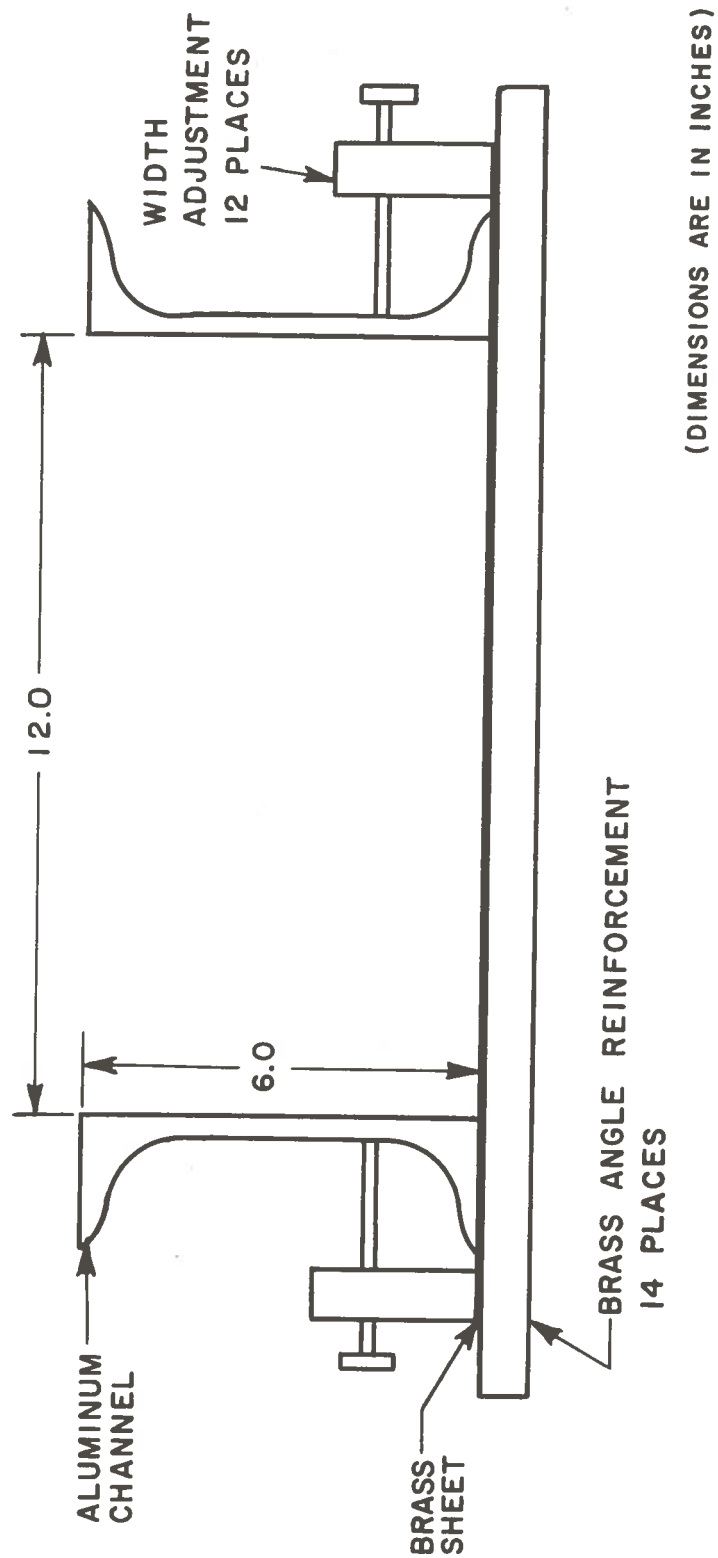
Schematic Drawing of Guideway Cross Section
